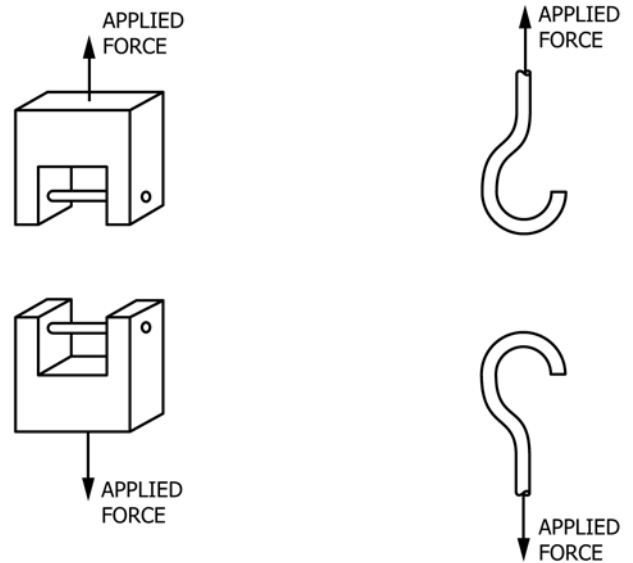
Schematic Drawings of Possible Pull (Tensile) Test Fixture Configurations
